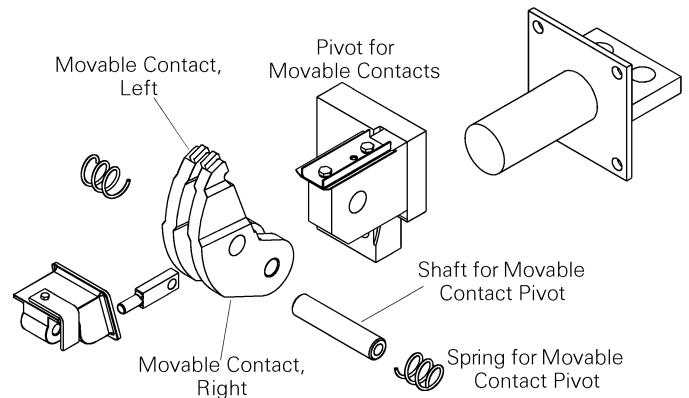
Lower Contact assembly for WPX08, WPS16, WPF16, and WPH16.
